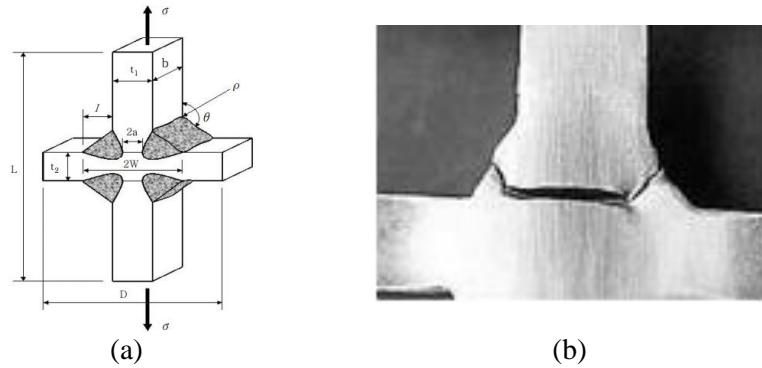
Configuration and view of the load carrying specimen; (a) Configuration of cruciform welded joints, (b) Cruciform specimen view [12]
